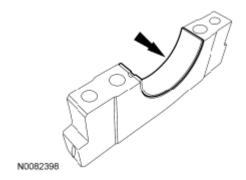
Locating Crankshaft Main Bearings Courtesy of FORD MOTOR CO.
